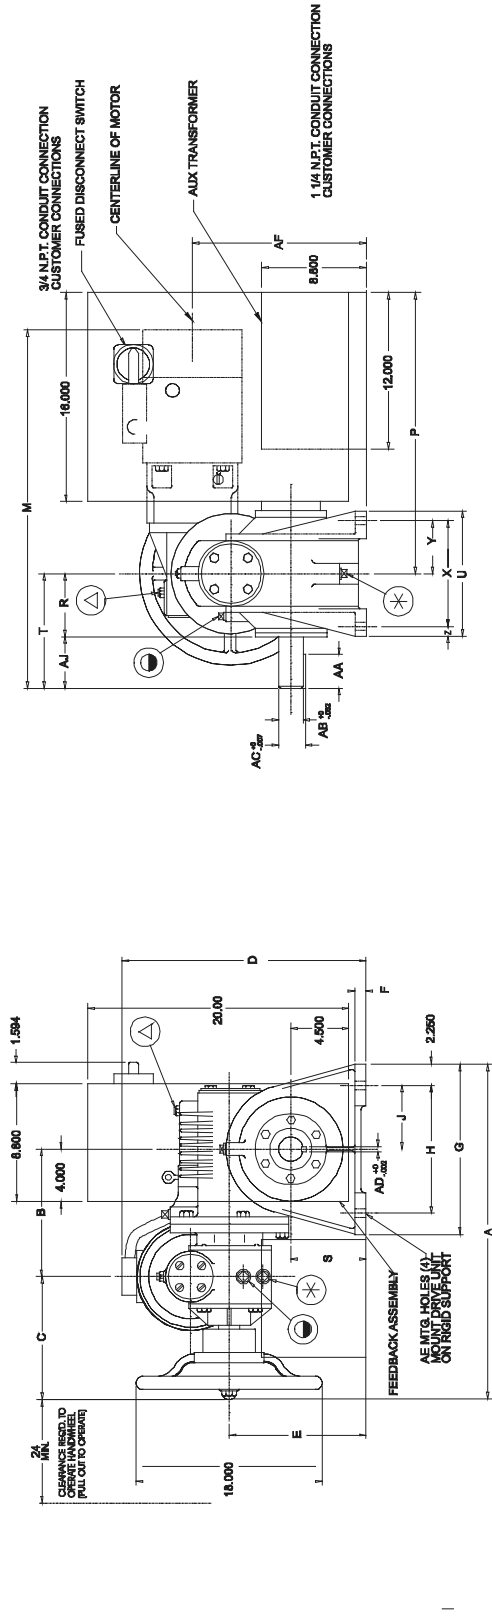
Mounting and Outline Dimensions for 11284A, 11285A, 11286A, 11288A, and 11289A Weather-Proofed Motor Actuators - Right Hand Floor Mounting, Handwheel Shaft Horizontal (D-MTG-616-100)
